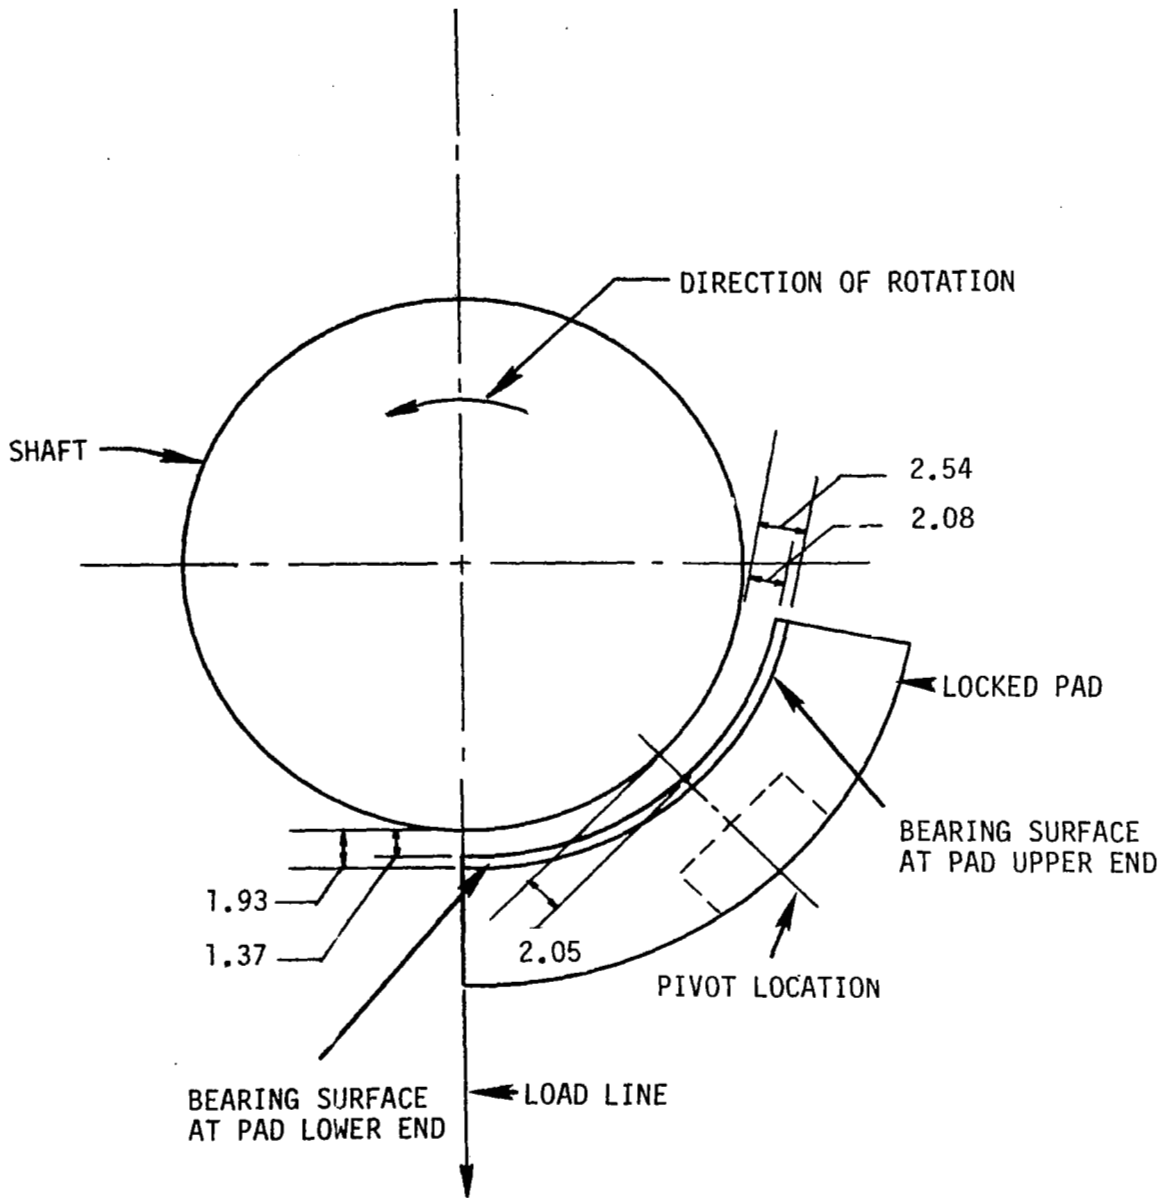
View Looking Downward on Pad Locked Askew. Dimensions in Mils.
